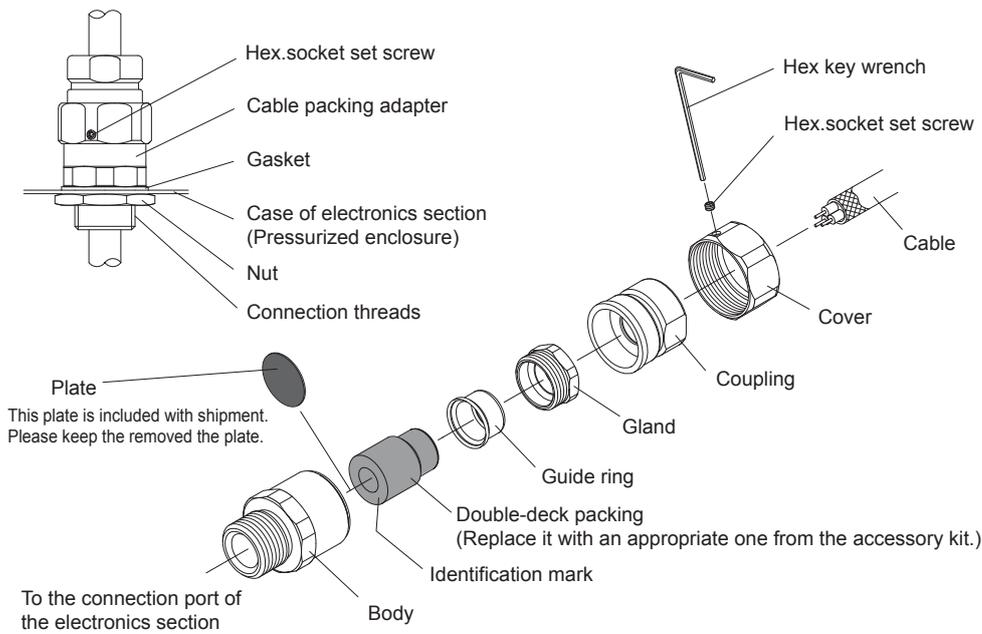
Procedure for mounting a cable packing adapter for the electronics section
